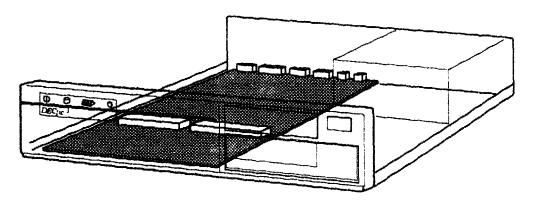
Placing the Main Board (and CPU Board) into the Computer's Chassis
